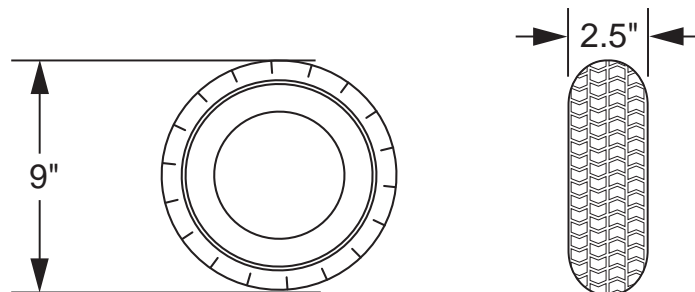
A. SUNDANCER WHEEL DIMENSIONS (FRONT AND REAR)
